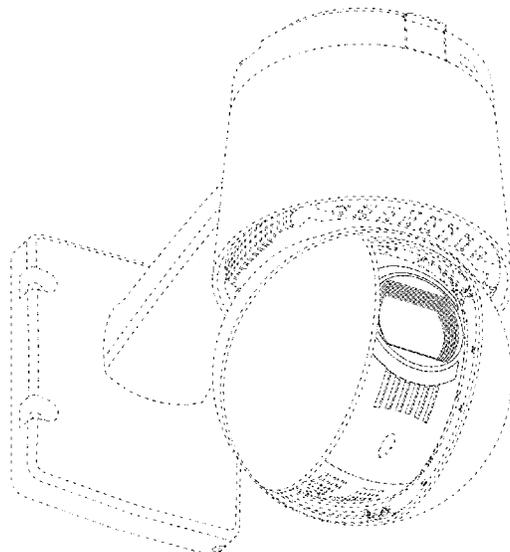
is a second side view of the surveillance camera assembly of FIG. 1.
